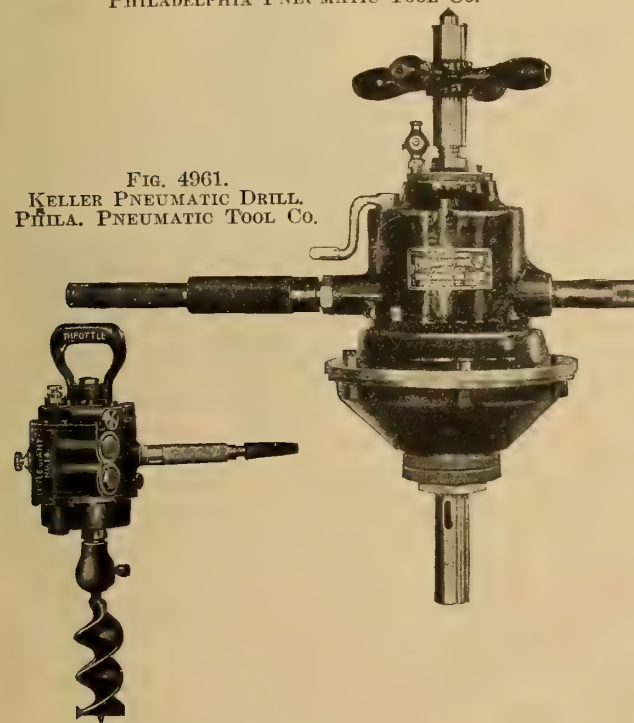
KELLER PNEUMATIC DRILL. PHILA. PNEUMATIC TOOL CO.
